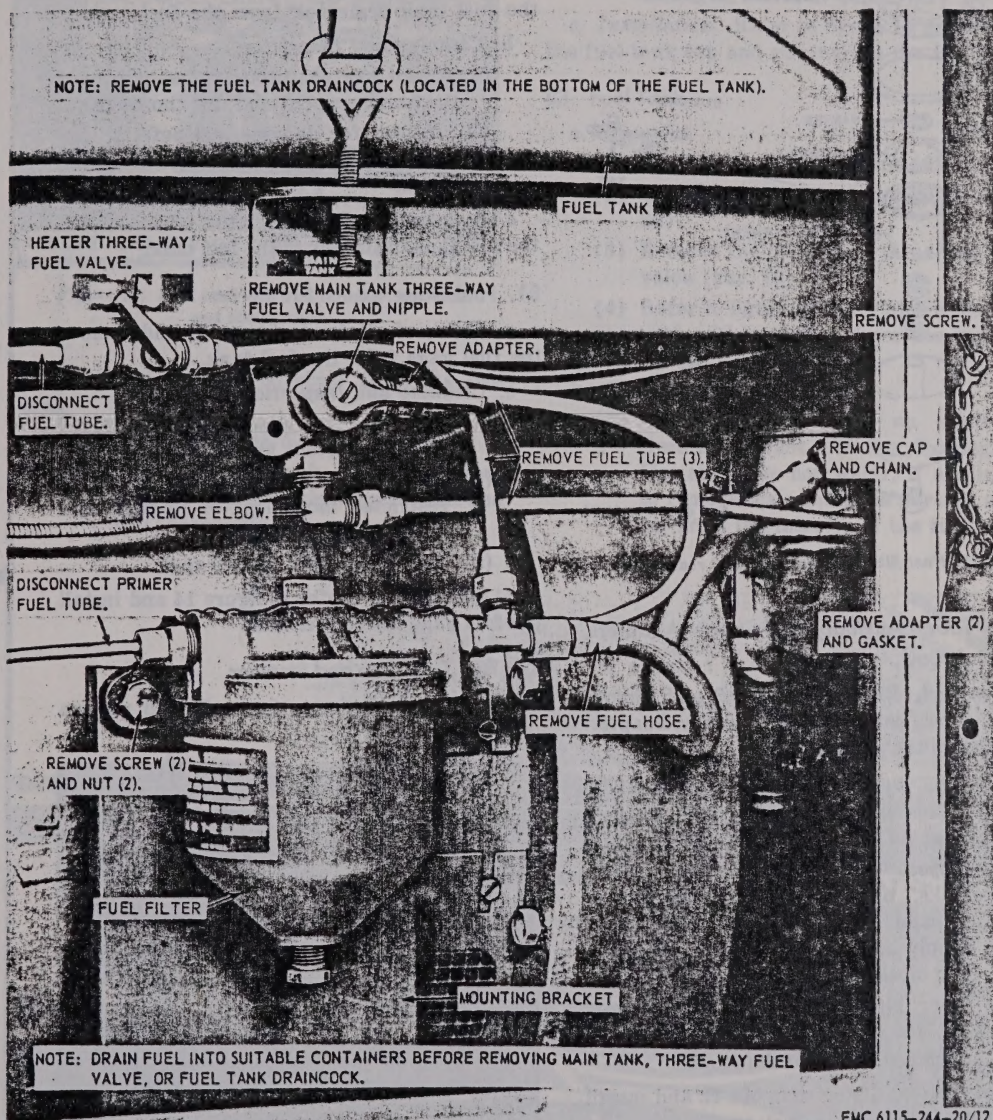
Fuel filter, main tank and heater three-way fuel valves, fuel tank draincock, and auxiliary fuel supply adapters and cap, removal and installation.
